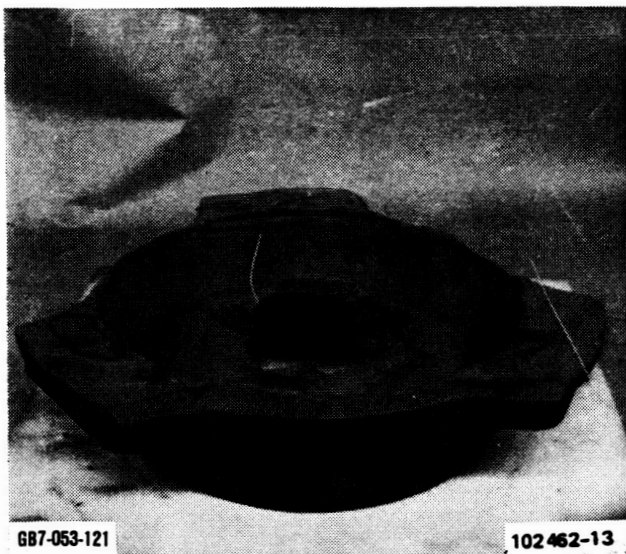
Breaking of Turbine Shroud Shown After Removal of Rubber Coated Mandrel.
